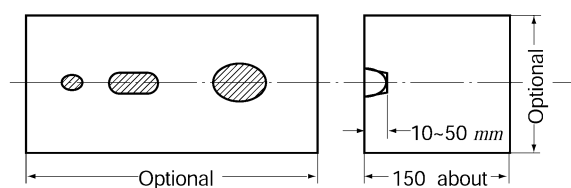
Dimensions and Shape of Test Coupon (Units : mm)
